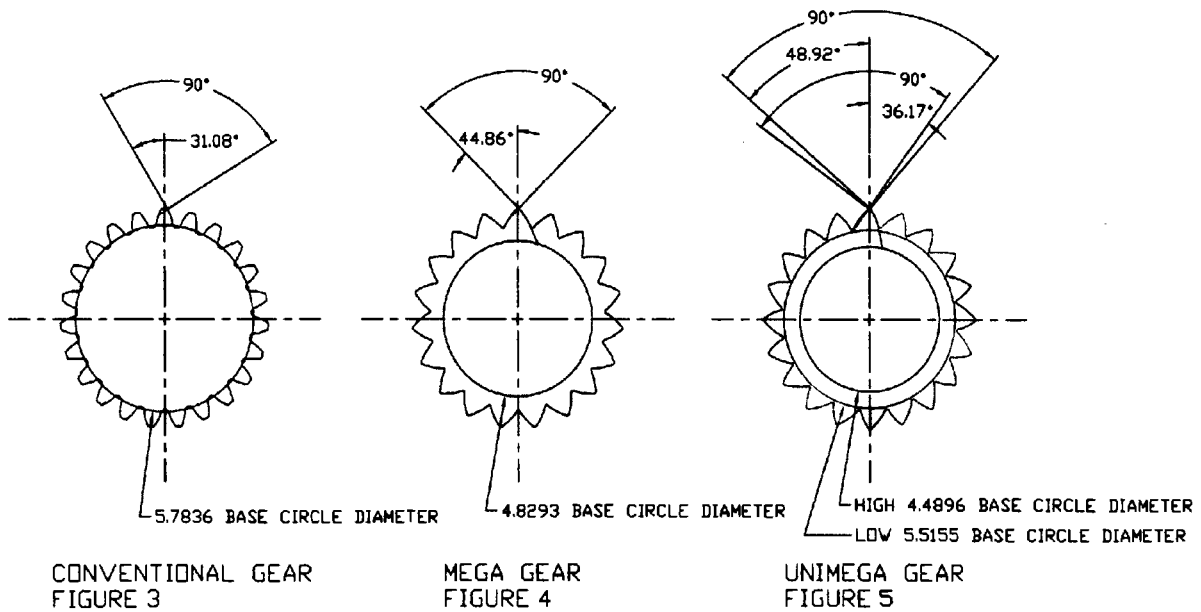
, 4, and 5, show the gears as calculated for Table Number 1. Note that Figure Number 3 shows a 20° pressure angle gear, which we refer to as a conventional gear. This type of gear is being used almost exclusively all over the world. Note that the base circle diameter is at the root diameter. This results in a short involute radius at the point of profile contact ratio of 1.0 or at the start of active profile.
